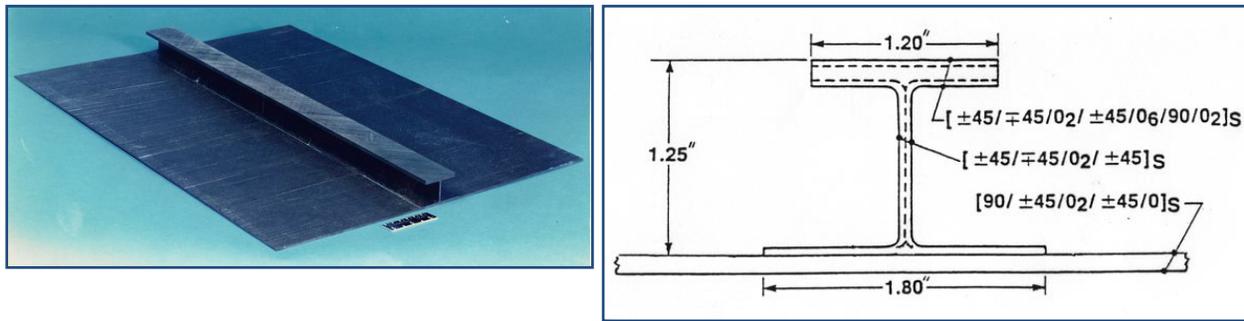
Photograph of a Skin-Stringer Panel Fabricated by Rubber Expansion Molding; Sketch of Layup
